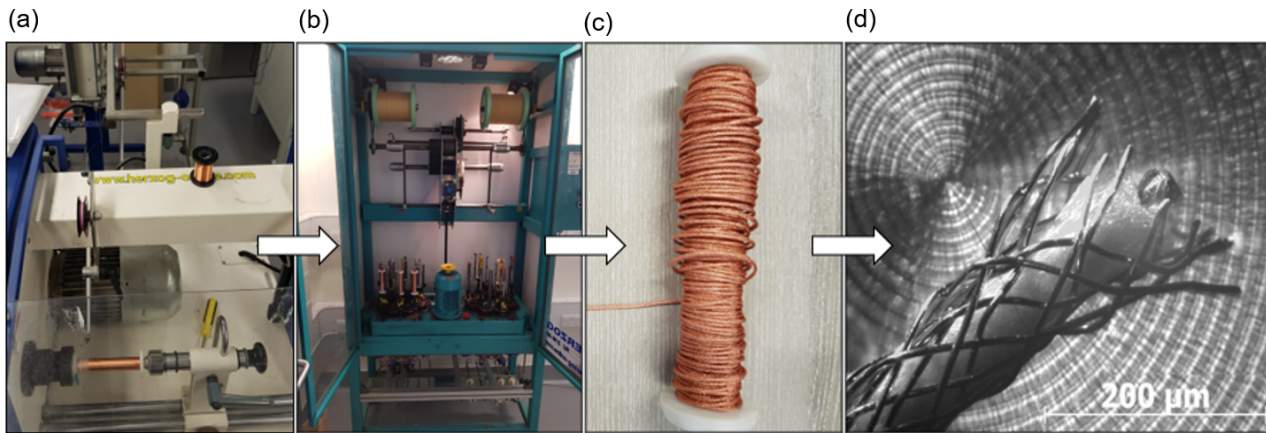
The manufacture of piezoelectric smart hybrid braids: a) filament winding equipment; b) Maypole braiding machine equipped with two rotary heads, each head having eight horn gears and eight carriers; c) a representative sample of the fabricated smart hybrid braid prototypes; and d) a microscopic image of the developed piezoelectric smart-braid harvester composed of a core electrode (a 0.4 mm PUR-enamelled copper wire), a piezoelectric sheath (8 PVDF yarns), and an outer electrode layer (16 strands of a 0.1 mm PUR-enamelled Cu-wire).
